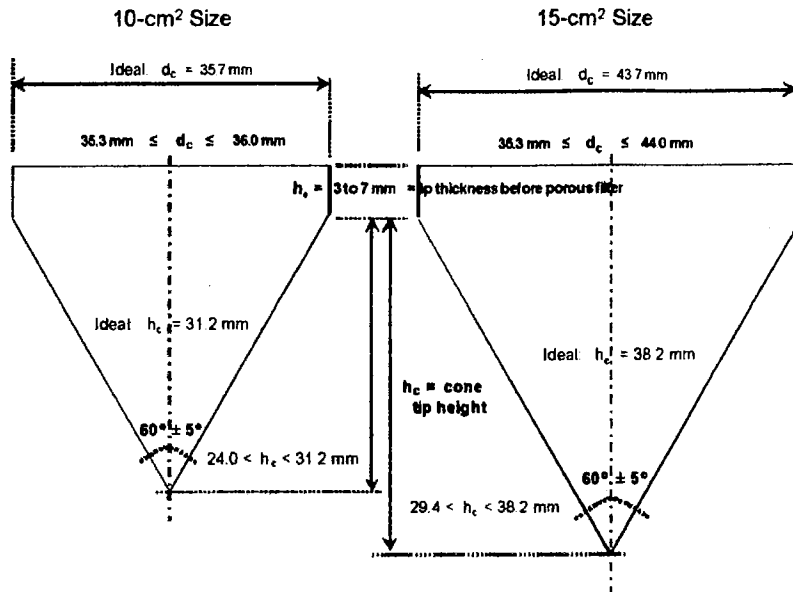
Manufacturing and Operating Tolerances of Cones (3)
